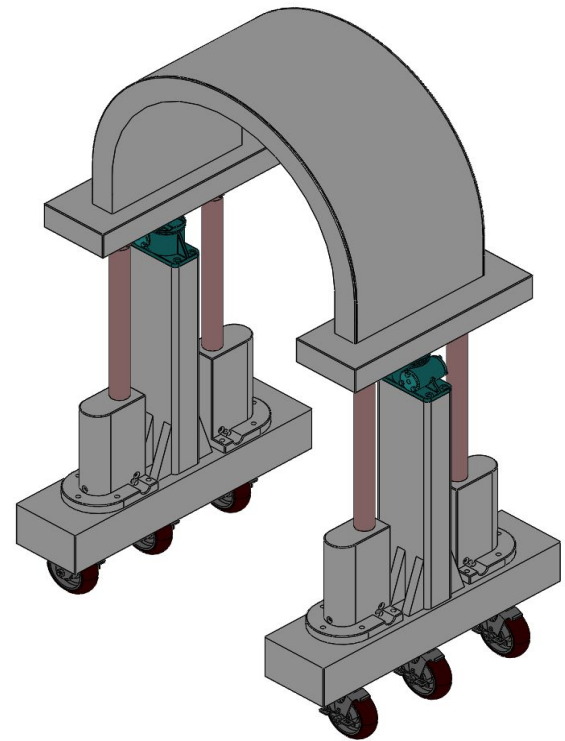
SolidWorks view of the assembled final design. Lipped cylinder (grey), linear actuators (red), and power jacks (green) and transportation system
